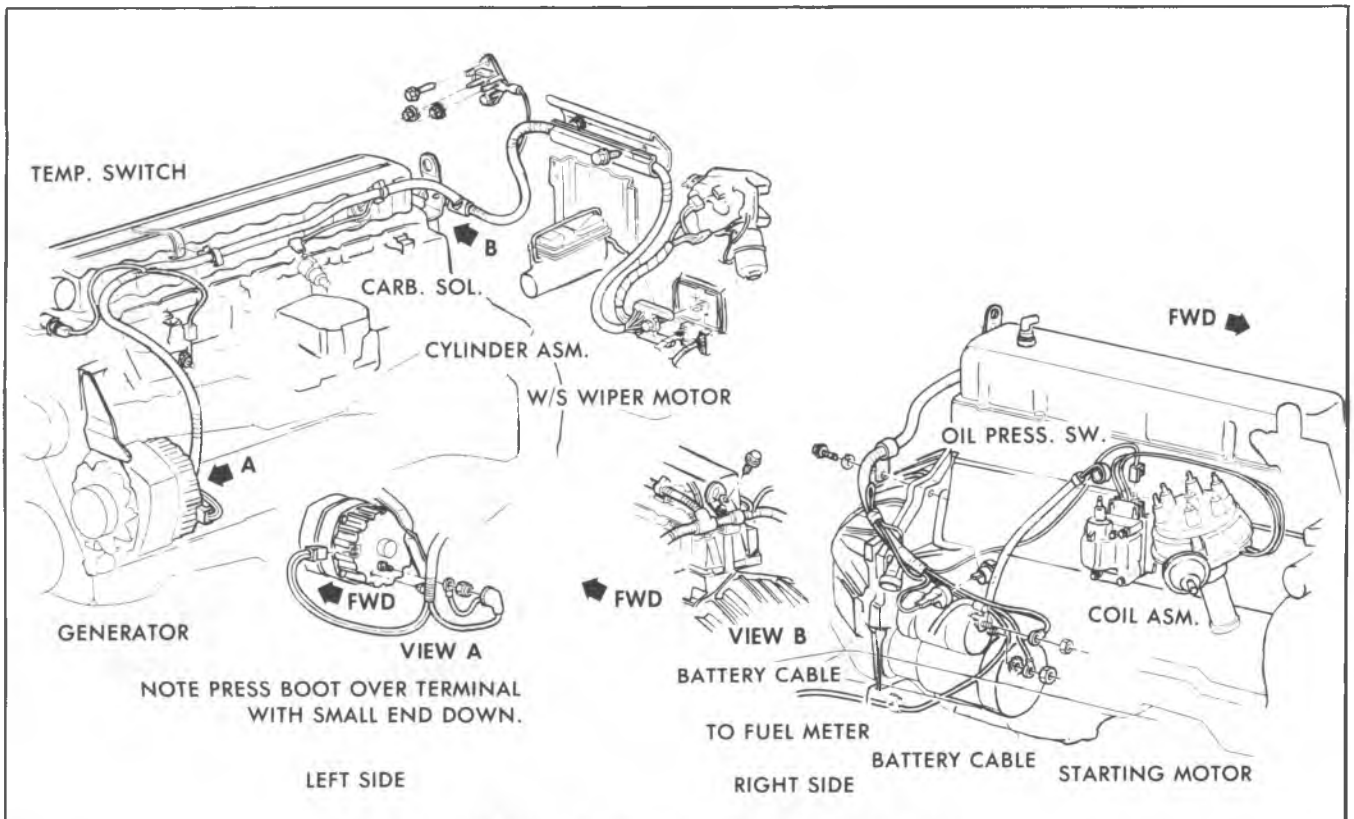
C-10 (03) Truck L-6 (LD4) w/o F44 Engine Wiring
